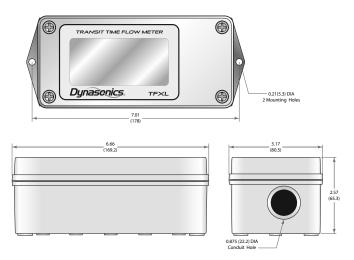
ENCLOSURE DIMENSIONS
